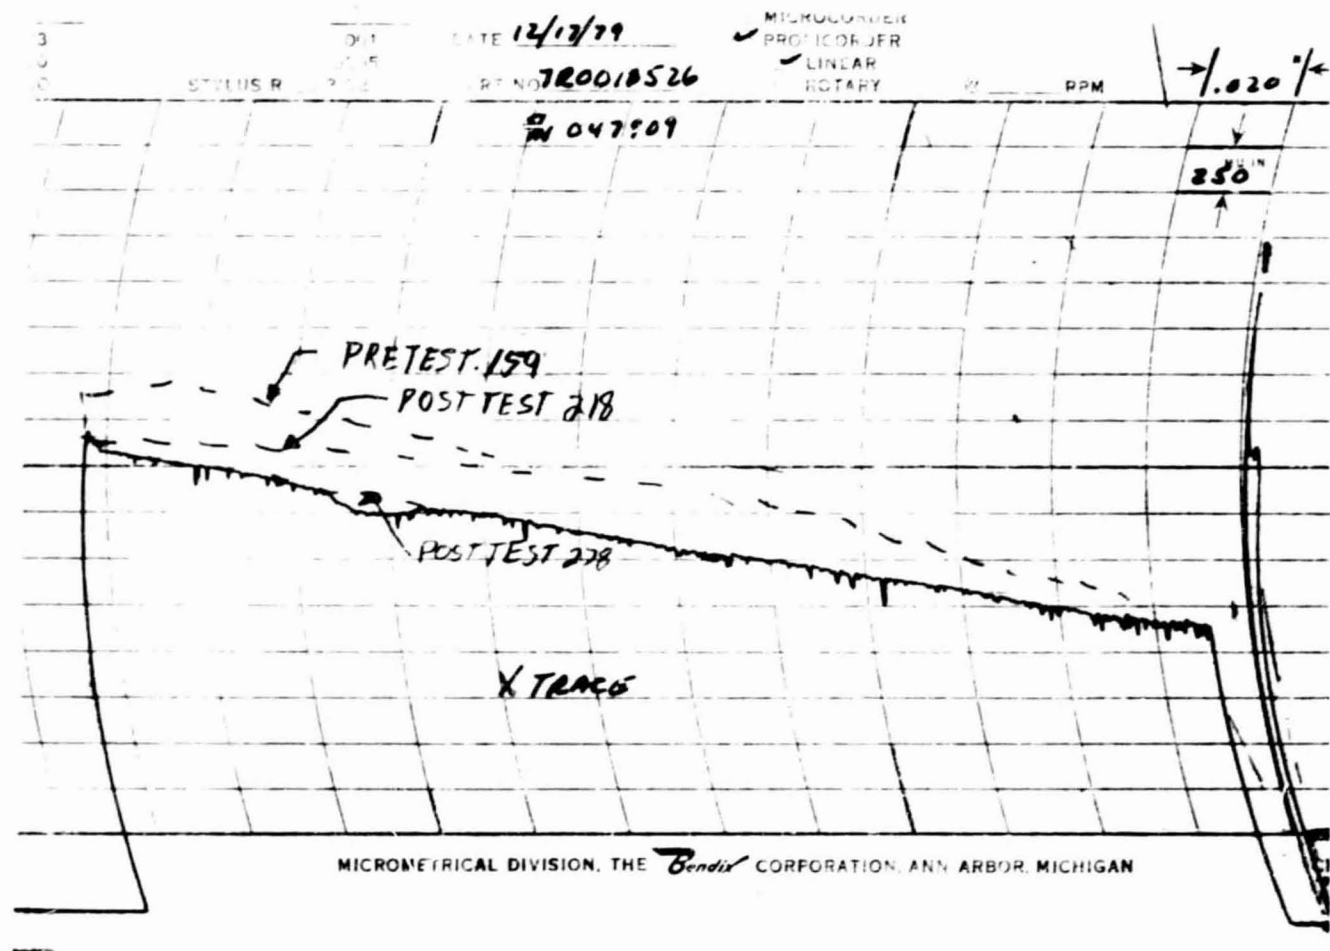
Surface Profile Trace Pump End Secondary Seal Ring, P/N 7R0011526, S/N 047909, Build 15, Posttest 297
